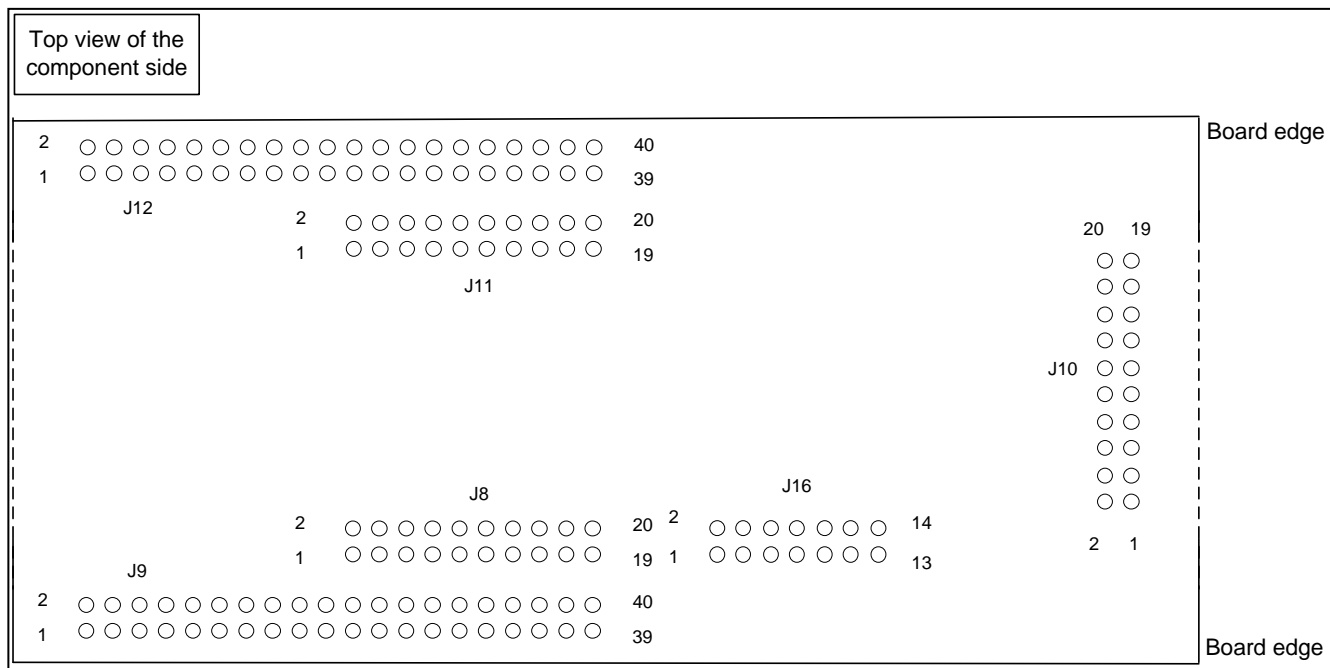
Extension Connector Pin Assignments (Top View of the Component Side)
